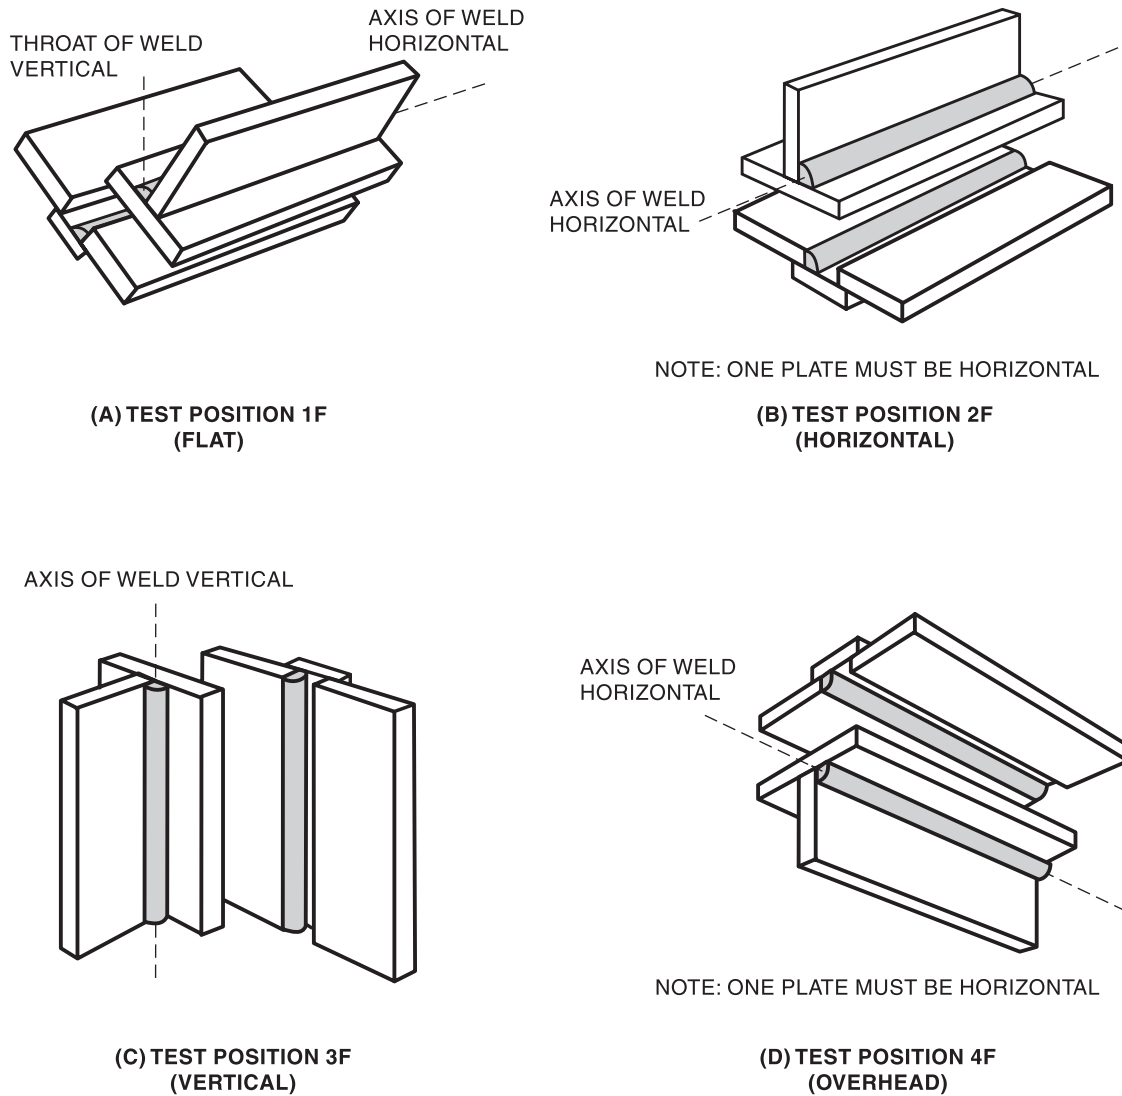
Positions of Test Plates for Fillet Welds
